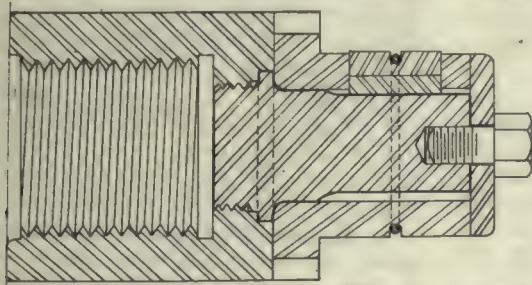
SECTION AND END VIEW OF AUTOMATIC SHELL CHUCK.
